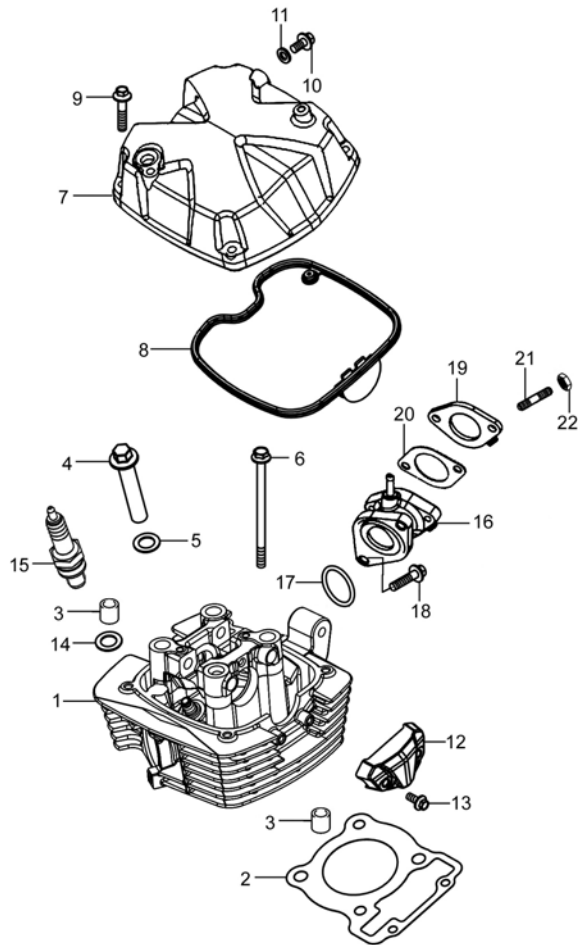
CYLINDER HEAD&CYLINDER HEAD COVER (P12-S010-0005)
